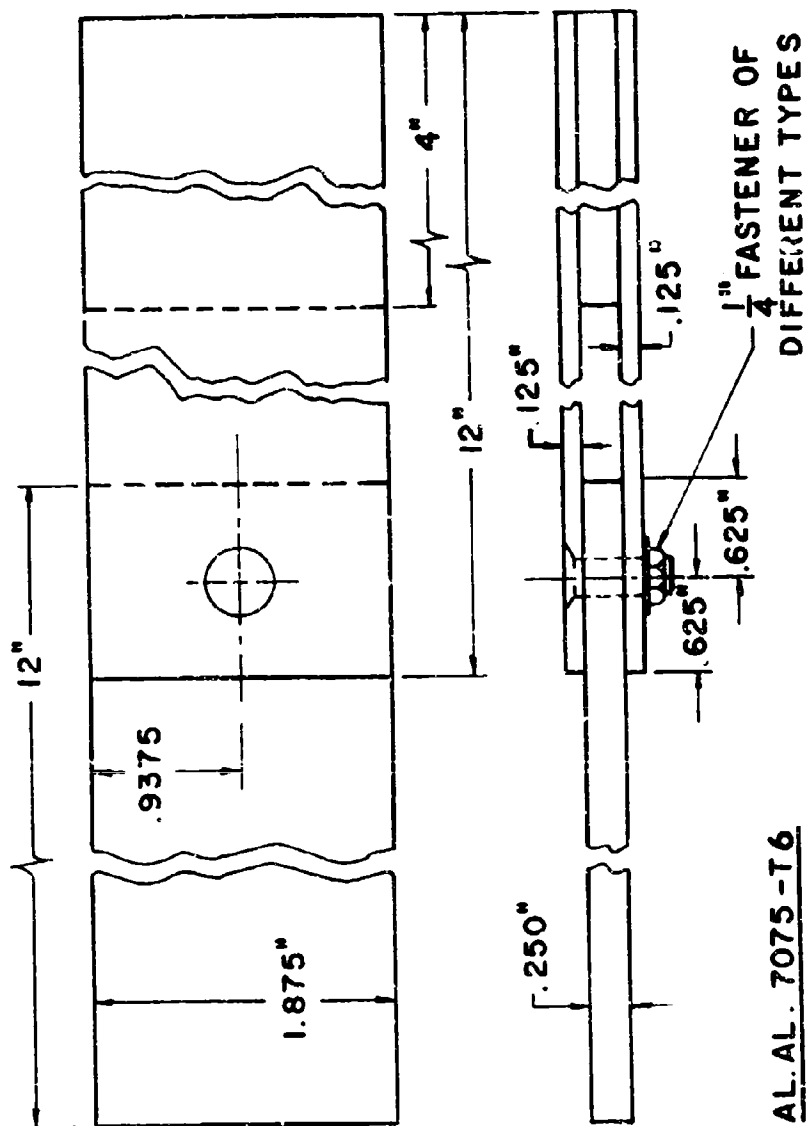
Test Specimen for Single Fastener in Double Shear
